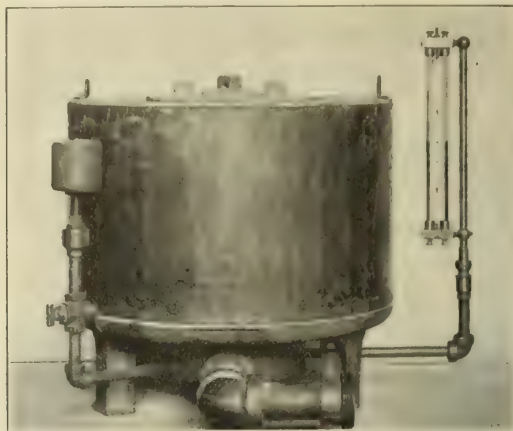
SIDE VIEW OF CRUCIBLE FURNACE SUPPLIED BY HOLES DRILLED IN RADIAL RIBS BETWEEN MIXTURE CHAMBER AND FURNACE BOX. MIXTURE SAMPLING BURNER IS SHOWN AT THE LEFT
